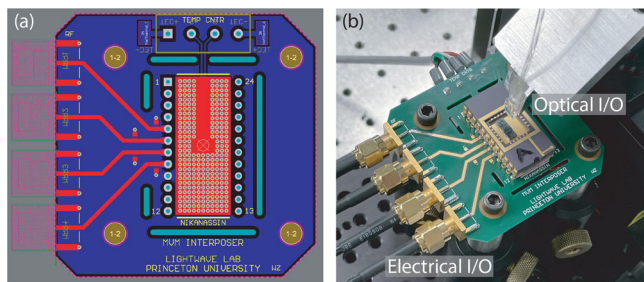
Example of an interposer design. (a) Design view in the PCB CAD software. (b) Footage of the interposer mounted with a photonic chip and fully connected with optical and electrical I/O.
